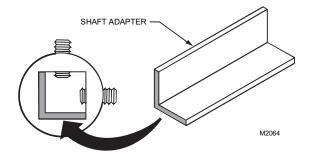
Using shaft adapter for 3/8 in. (10 mm) shafts.
